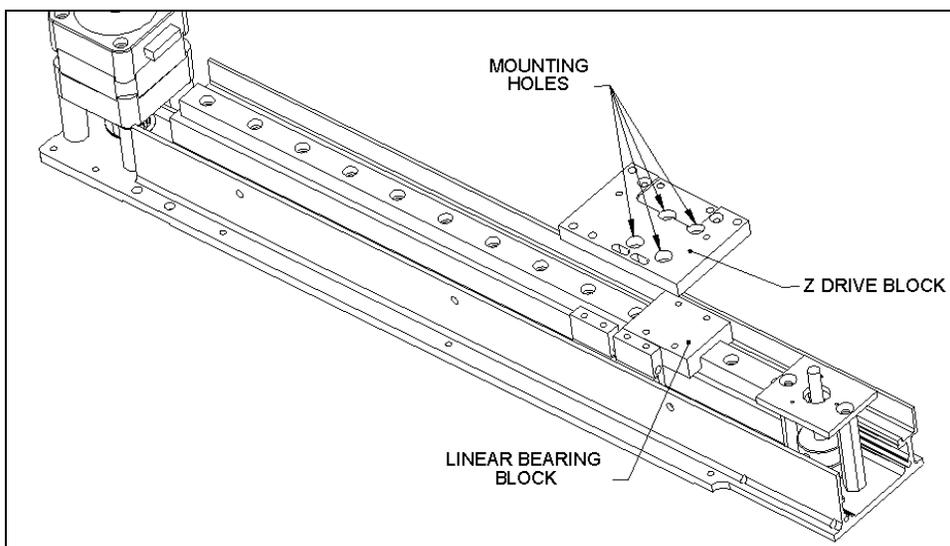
Z-Drive Block and the Linear Bearing Block
